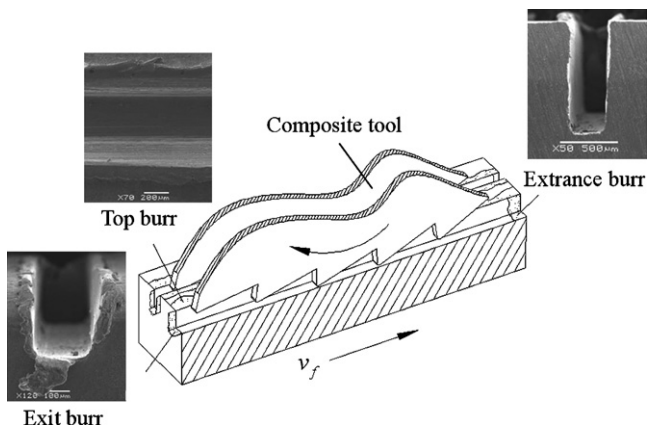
Three kinds of burrs formed by multi-cutter milling.
